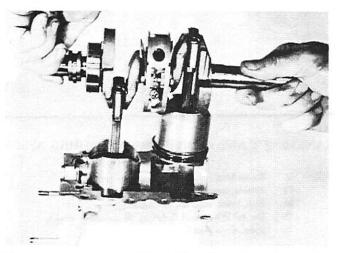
Removing and Installing Crankshaft Assembly from Cylinder Block
